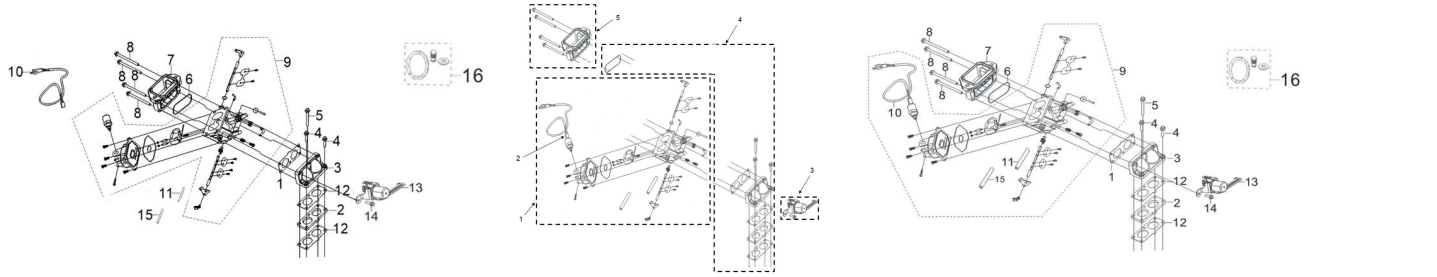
SHROUD, CYLINDER BODY / SHIELD,LOWER (E14)
